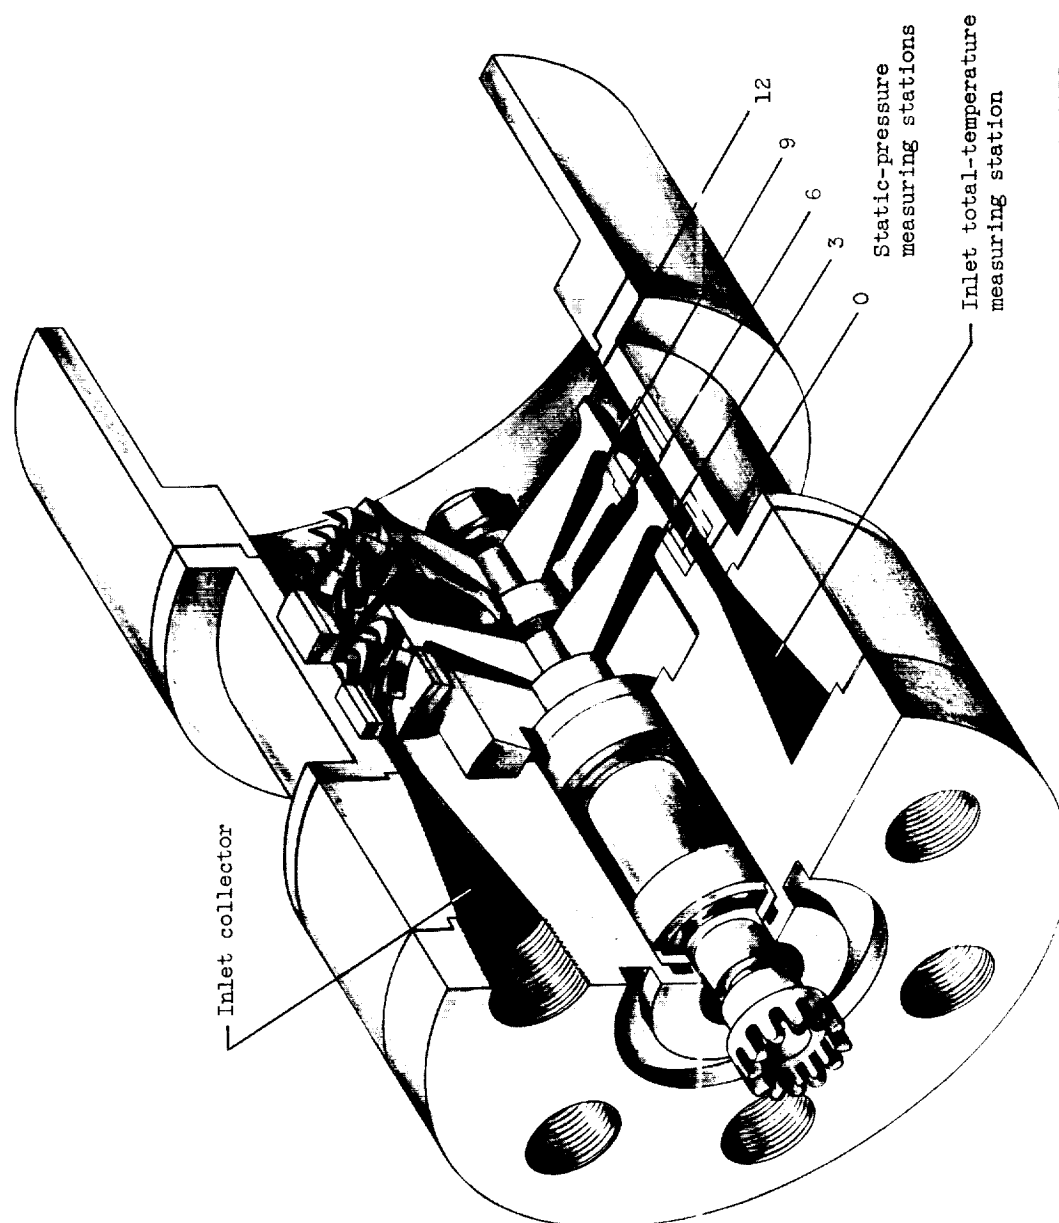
Cutaway view of 4.5-inch two-stage turbine.
